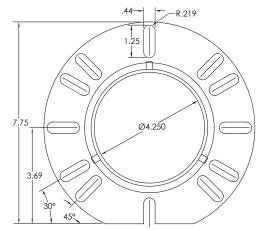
A -LNB 500 Mounting Flange (LNB 500 uses a universal flange)
